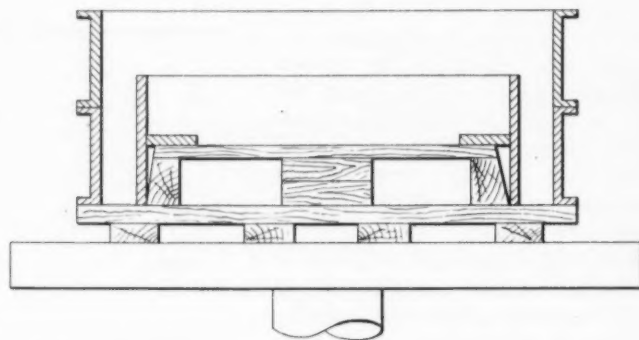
Grinder stand pattern on packed up follow-board ready to jolt drag portion of mold.
